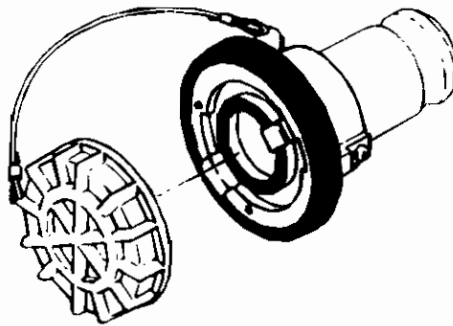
2" Unisex Non-Valved Coupling to 2" Male Camlock Adapter Assembly
